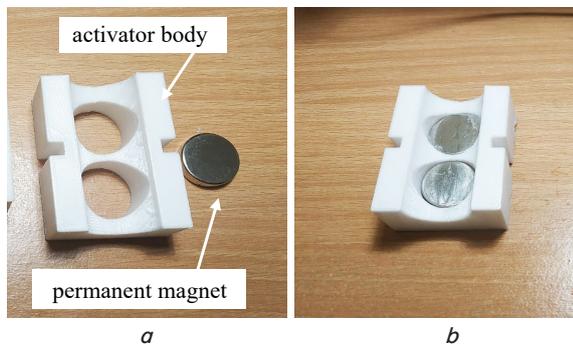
Activator design: *a* – disassembled; *b* – assembled
